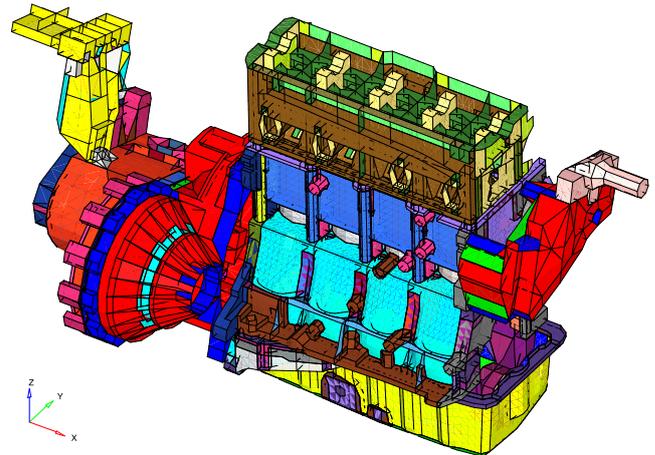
The car engine block-gearbox assembly: an initial FE model.
